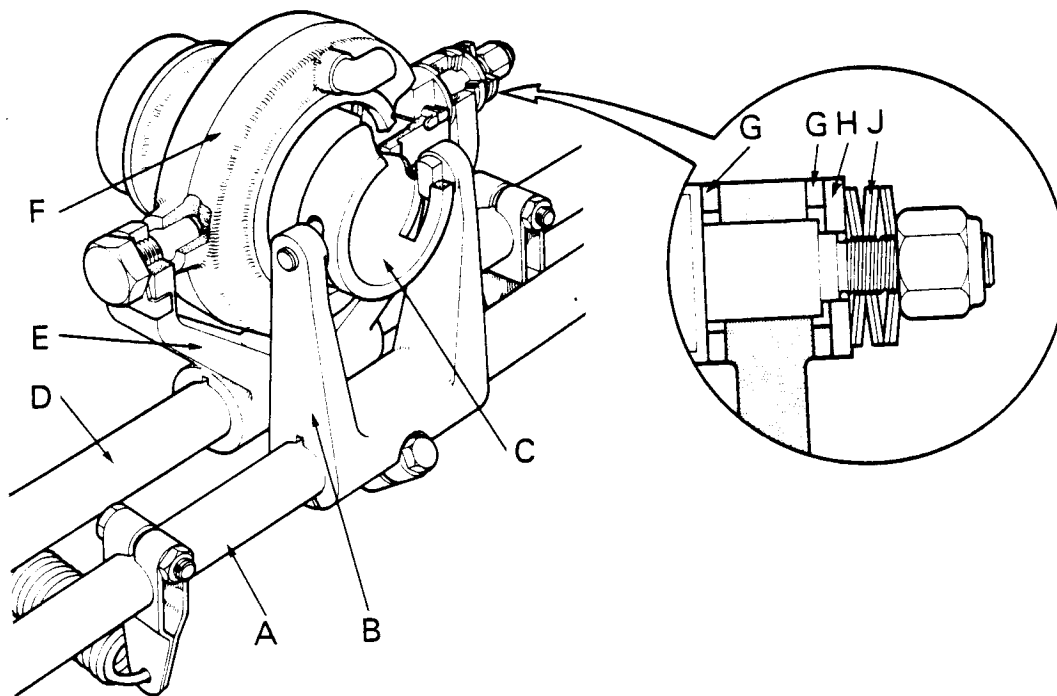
CLUTCH RELEASE MECHANISM — 1200 TRACTORS
